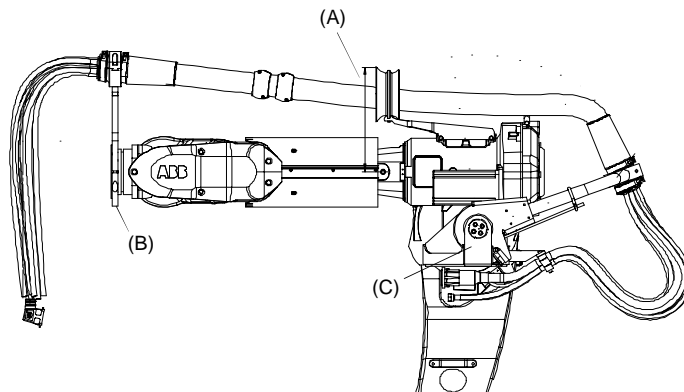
"Silver line" DressPack Upper arm left arm side view Spot Welding version.
